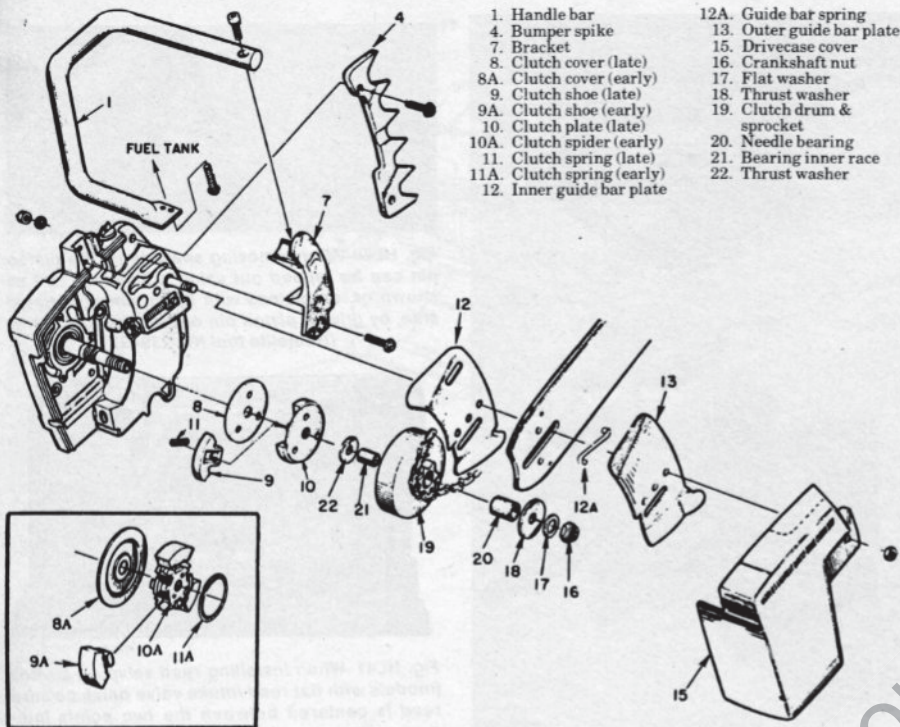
Exploded view of typical direct drive clutch assembly; refer to Fig. HL46 for gear drive models. Late type clutch assembly (items 8, 9, 10 & 11) is interchangeable as a unit with early production clutch shown in inset at lower left corner.
